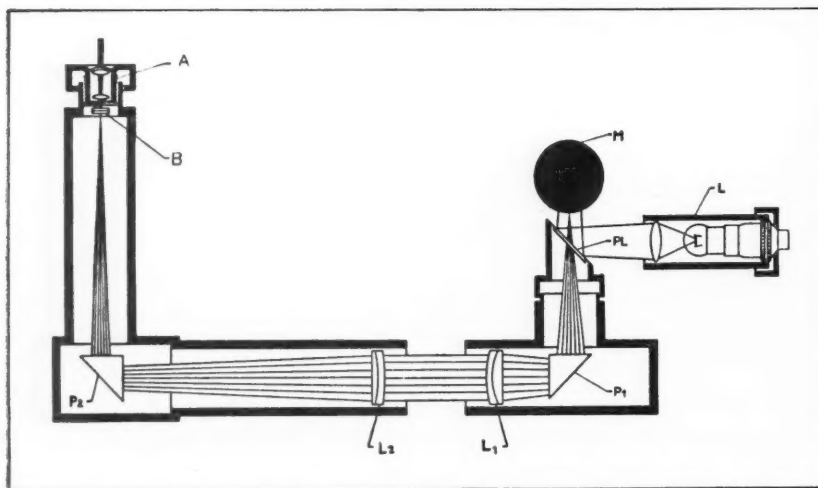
Optical system employed in Lindner jig boring machine for reading precision scales for both horizontal and transverse movements of table
